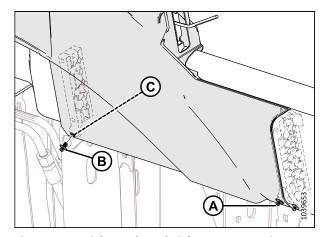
Right Outboard Linkage Cover – View from Rear of Header
